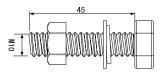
Dimensions of Fastener Set for Metal Frame(unit: mm)
